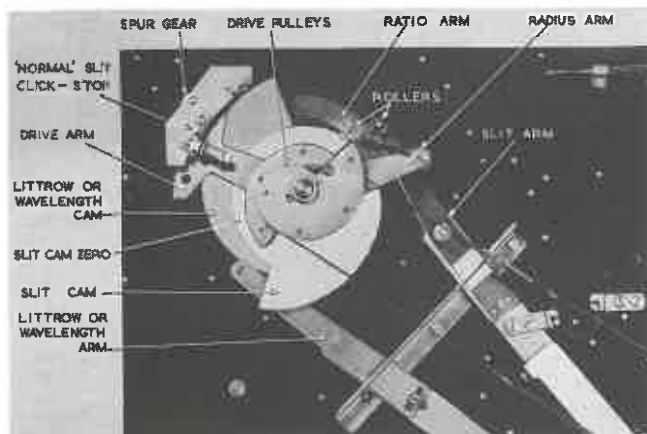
Drive & Slit Assemblies (Narrow)
